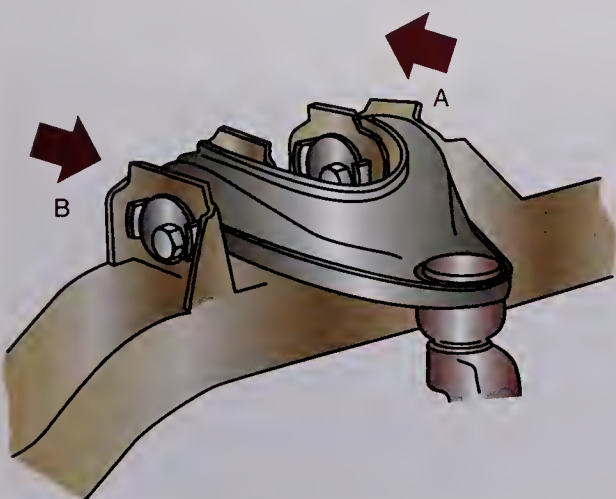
To decrease the positive caster move the front of the upper control arm (A) inboard and move the rear of the upper control arm (B) outboard.
